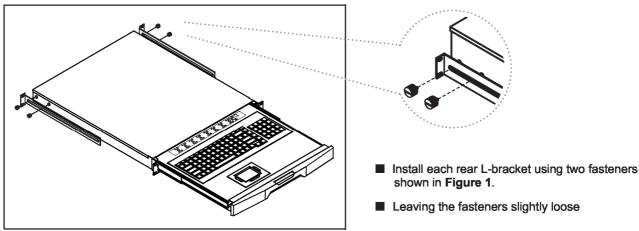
Installing the rear L-bracket to the keyboard drawer.
